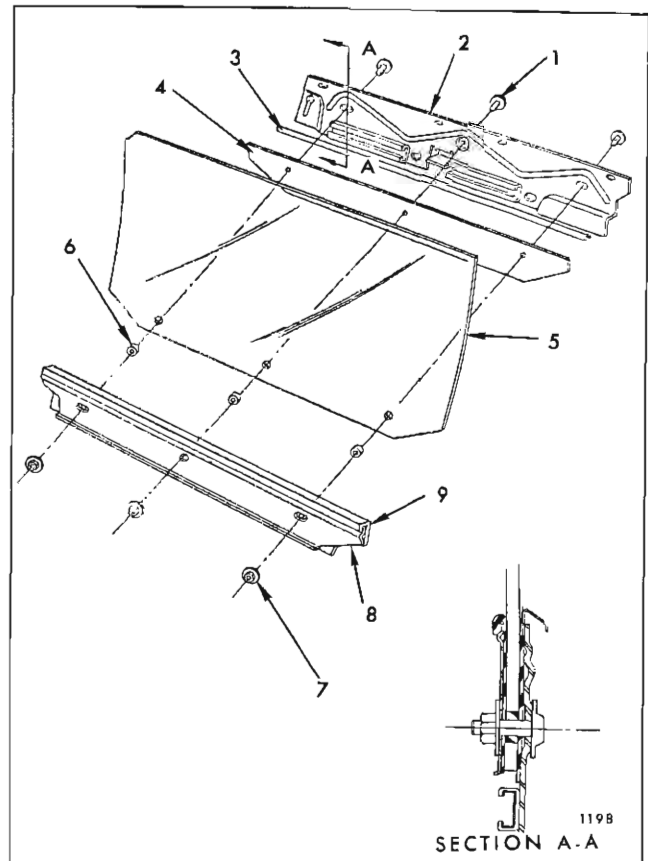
D23—Front Door Window Assembly "37" & "67" Styles
